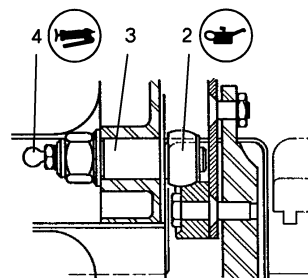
Greasing/Lubrication of Outboard Slat Rollers
